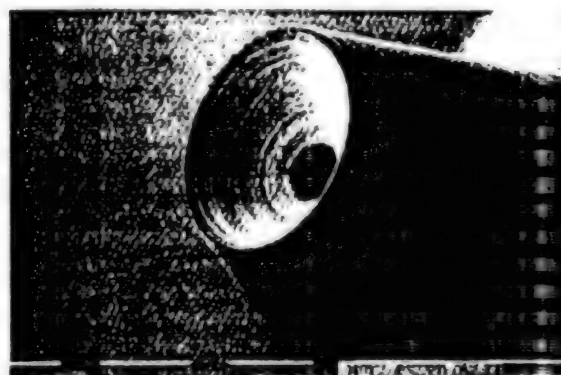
Tip of Wire Cutting Tool The cutting knife is cylindrical and tip diameter is 300 μ m. This diameter was eventually reduced to 200 μ m.
